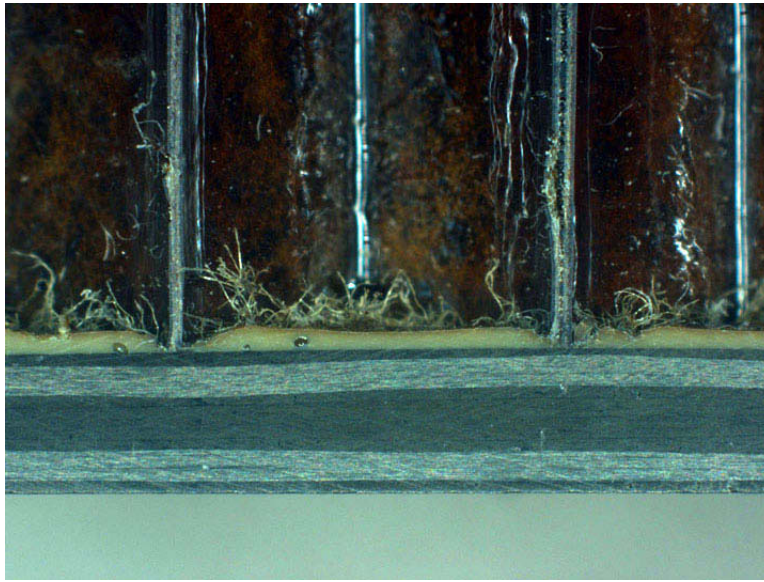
(e) *Poor fillet due to moisture in adhesive causing high surface tension.
